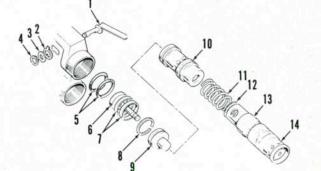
Exploded view of remote valve guick coupler assembly. 8. Snap ring
